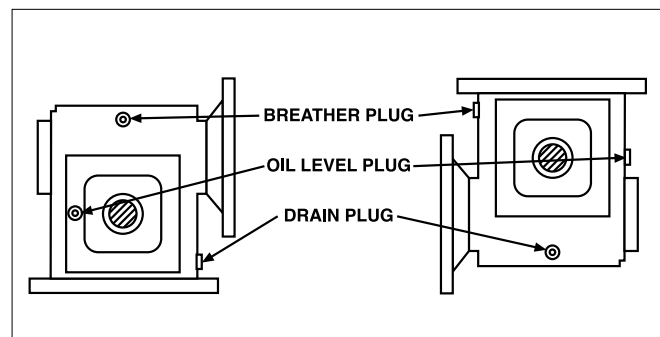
GEARBOX SCHEMATIC (TYPICAL)
